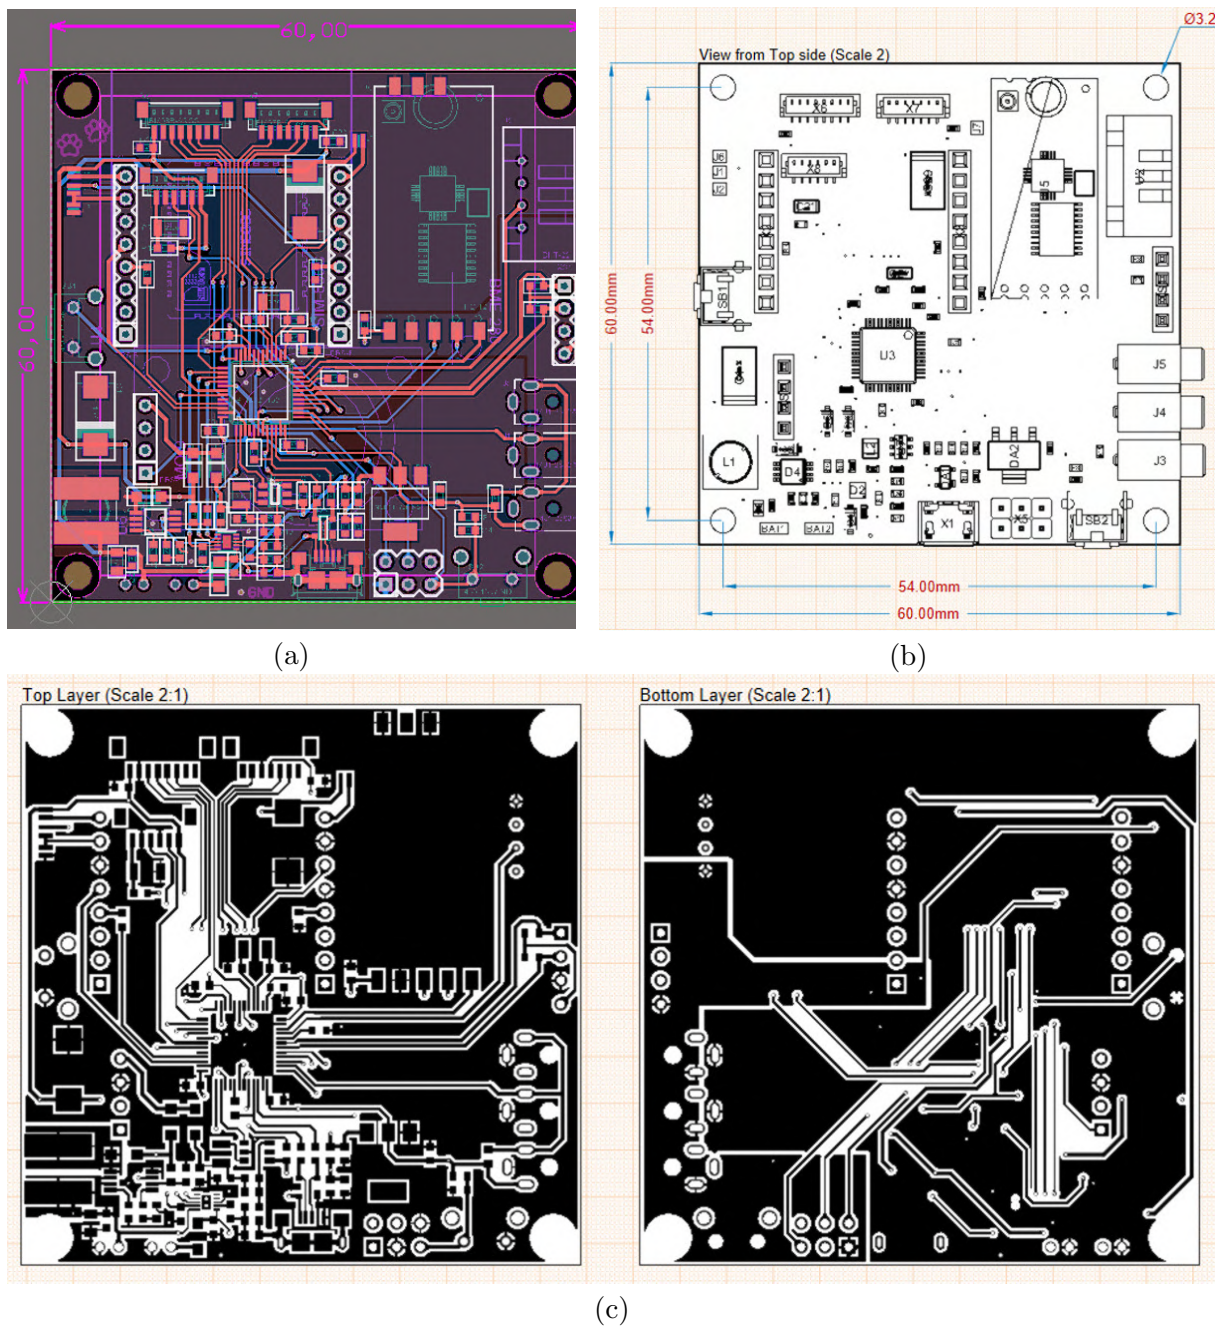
Printed circuit board of the measuring module: (a) printed circuit board in CAD; (b) drawing of the printed circuit board; (c) PCB topology.
